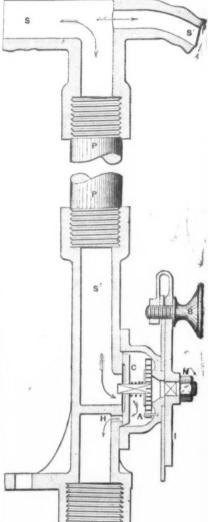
Sectional View of Regulating Value and Supply Pipe. er second. The vessels which convey the coal
